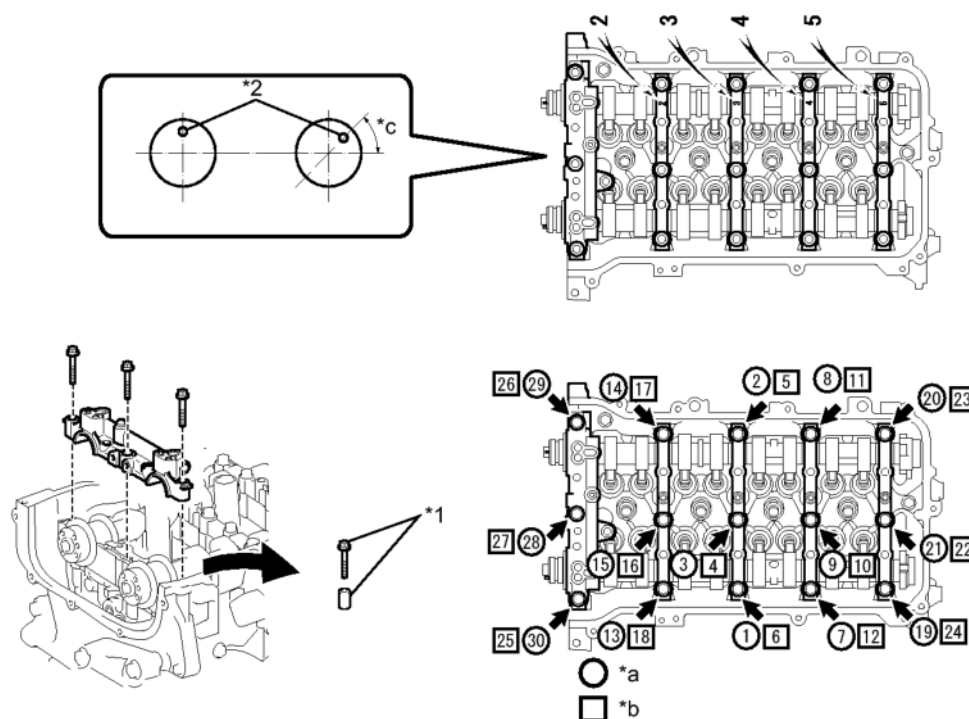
Identifying Bearing Cap, Bolt & Spacer Sequences
